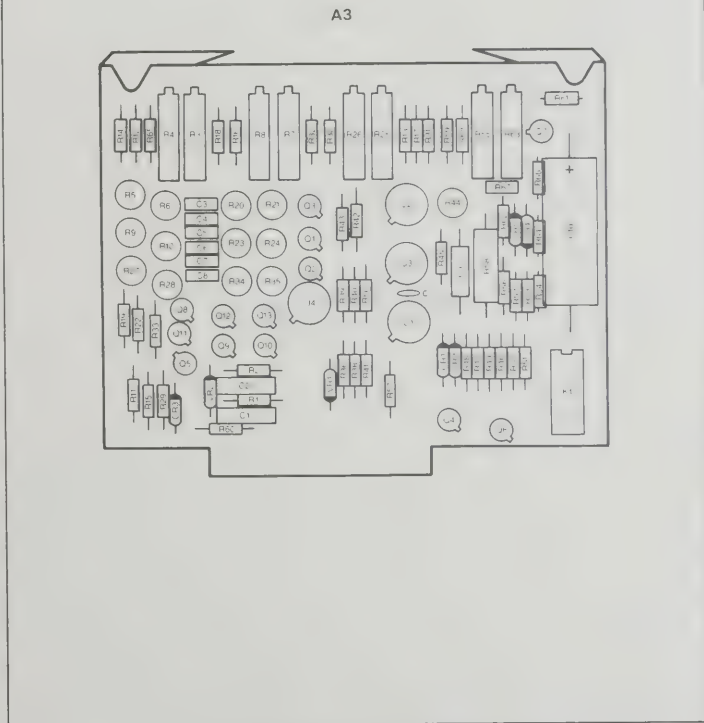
A3 YTO Driver Assembly, Component Locations
